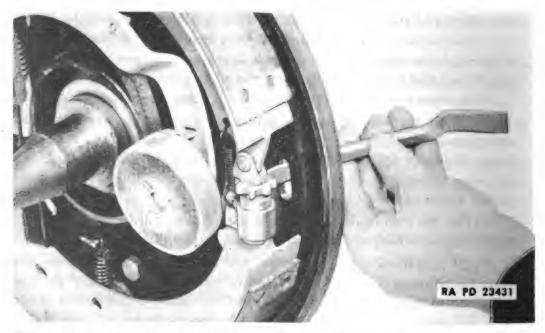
Method of Moving Adjusting Screw-Drum Removed
